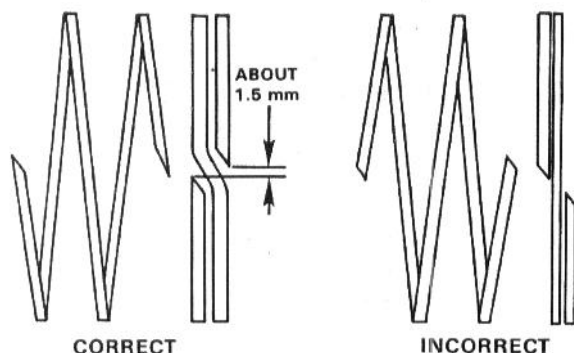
Positioning Beveled Cuts of "Spiral" Type Back-Up Washers
